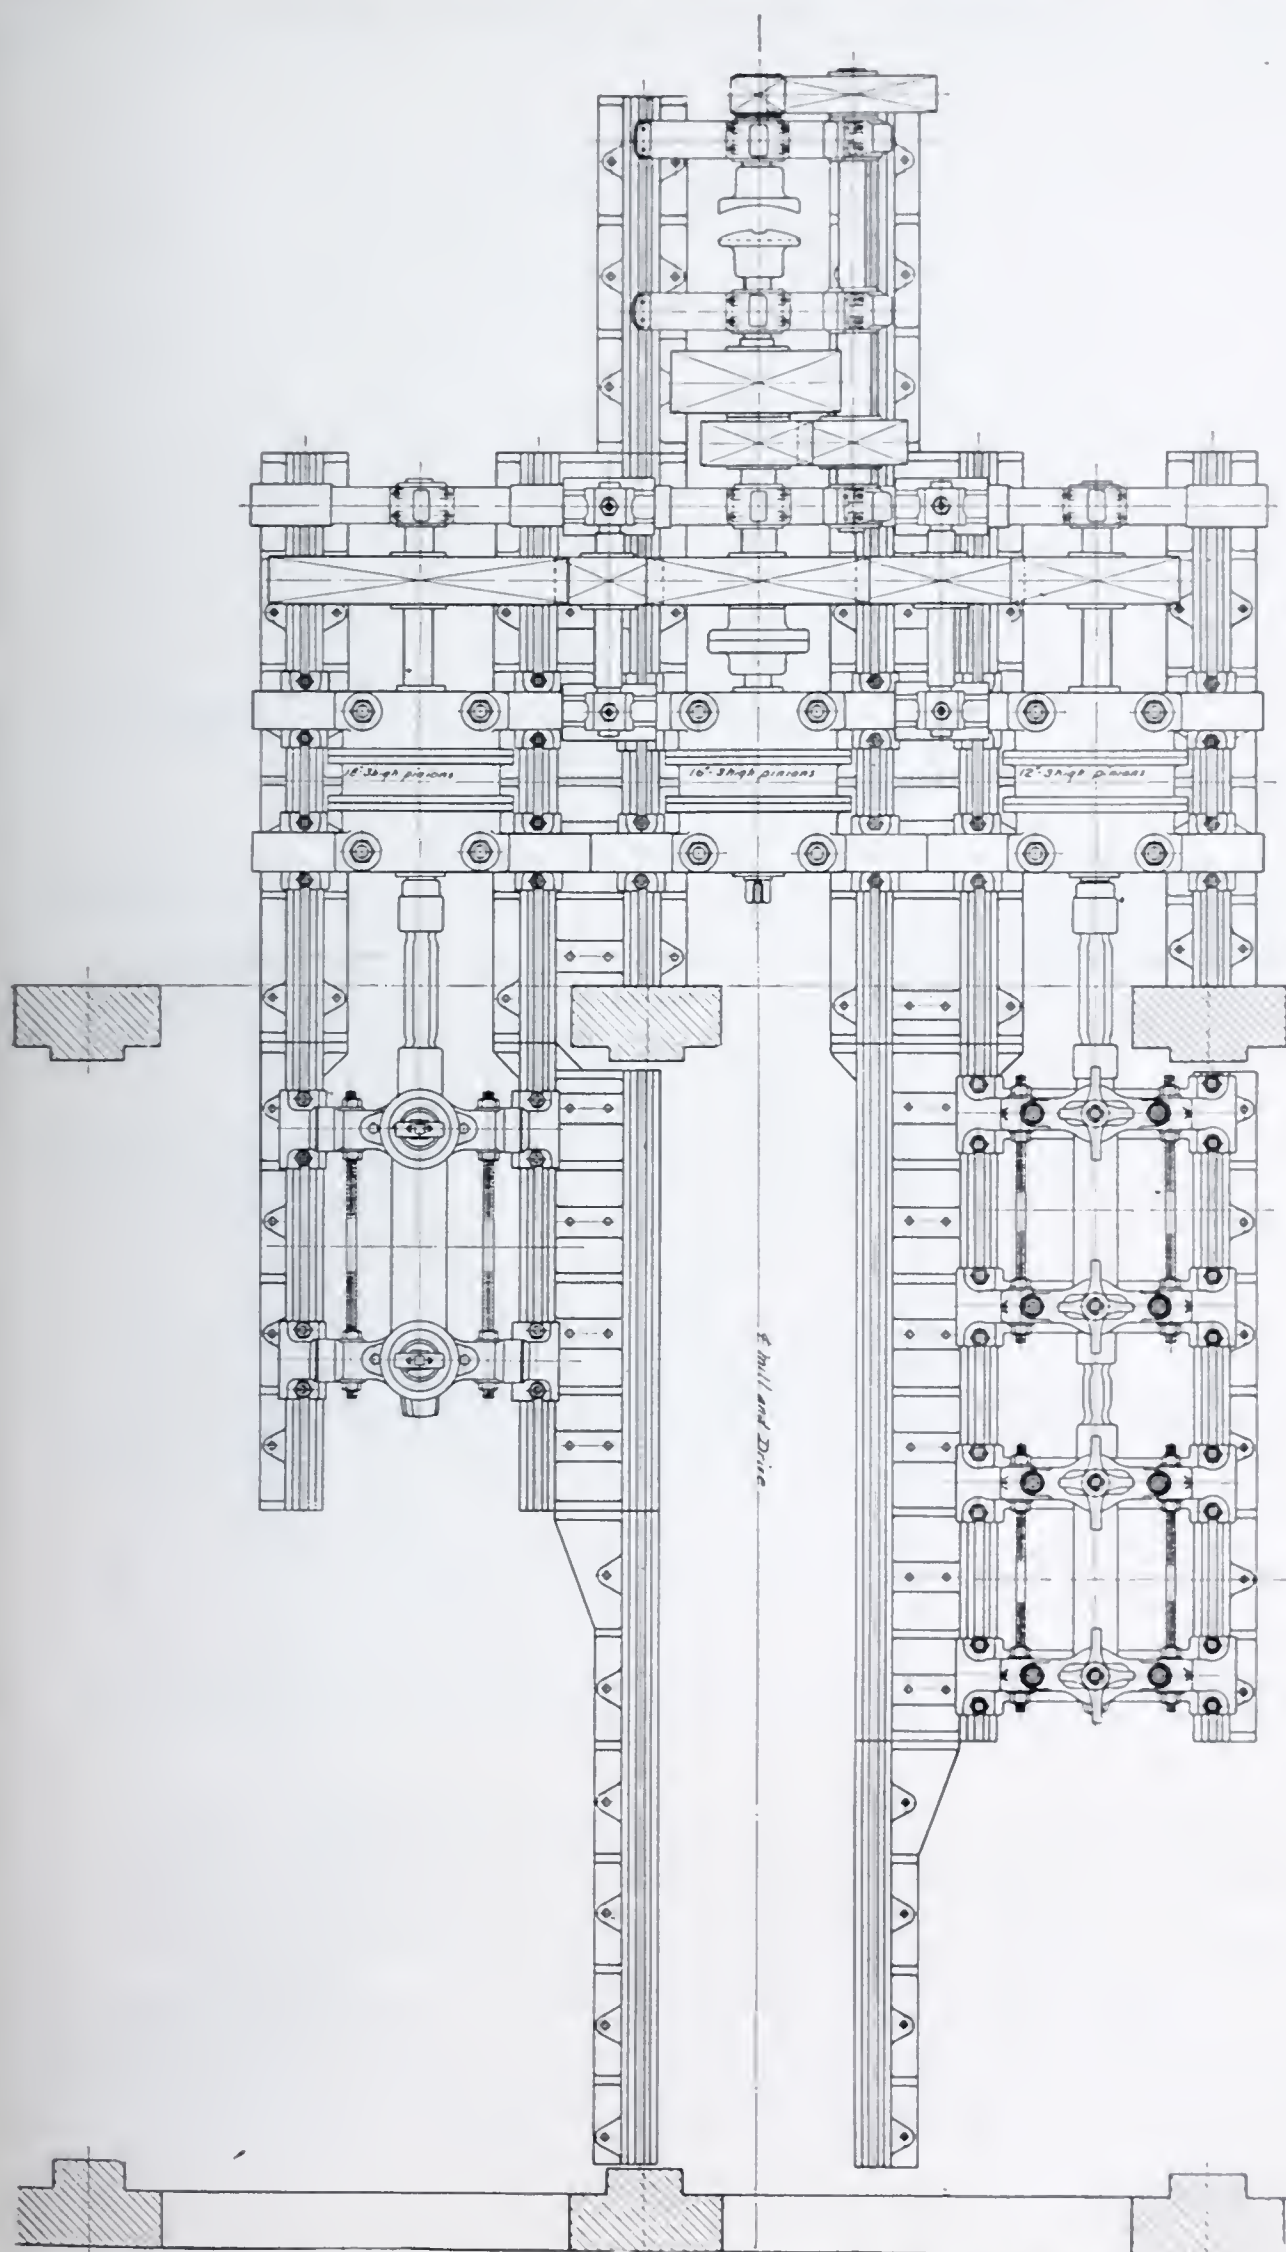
Plan of Roughing and Finishing Stands, with Drive.
